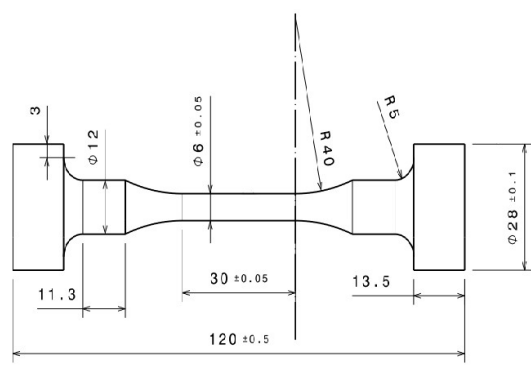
Schematic and dimensions of the specimen (all dimensions are in mm)
